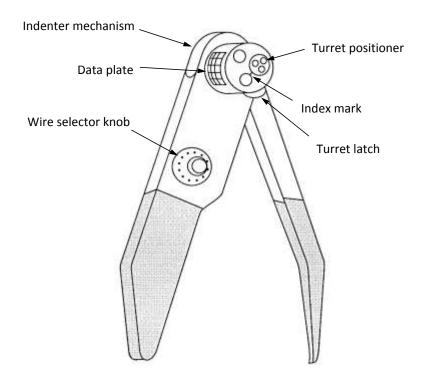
M22520/1-01 Hand Actuated Crimp Tool
